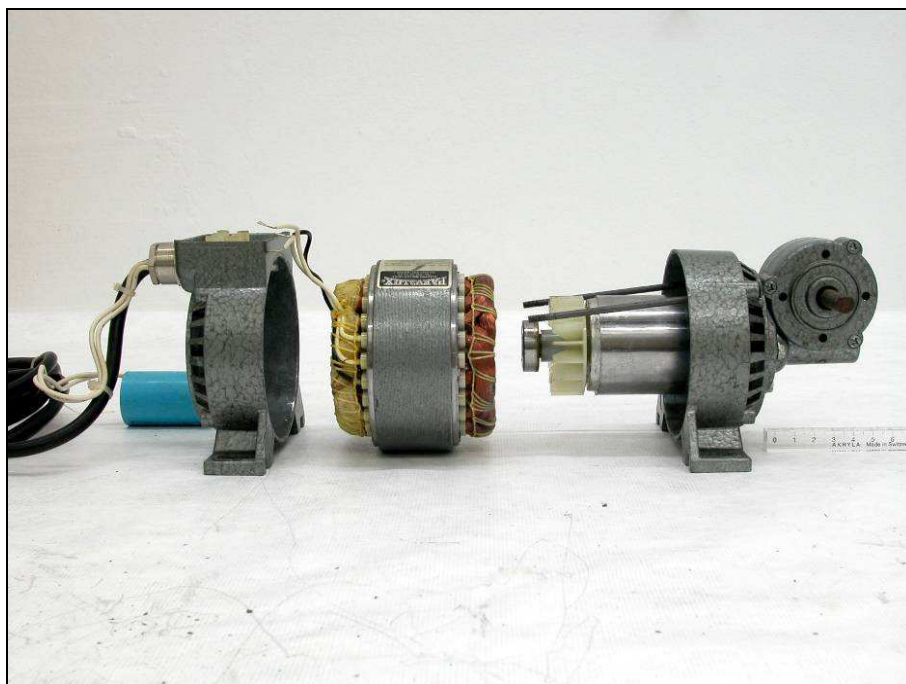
Open motor housing. Left: rear end plate; center: Stator; right: rotor with front end plate and gearbox.
